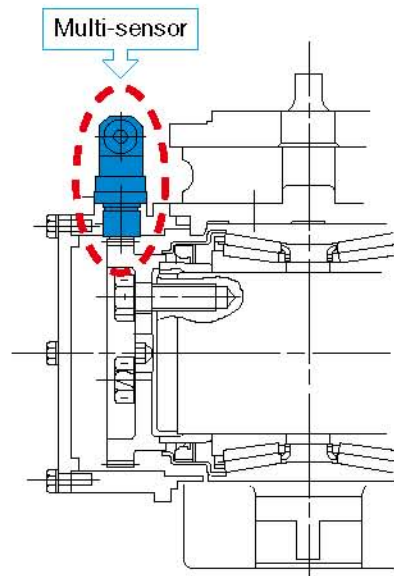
Separated type of multi-sensor unit used in axle bearings for railway rolling stock
